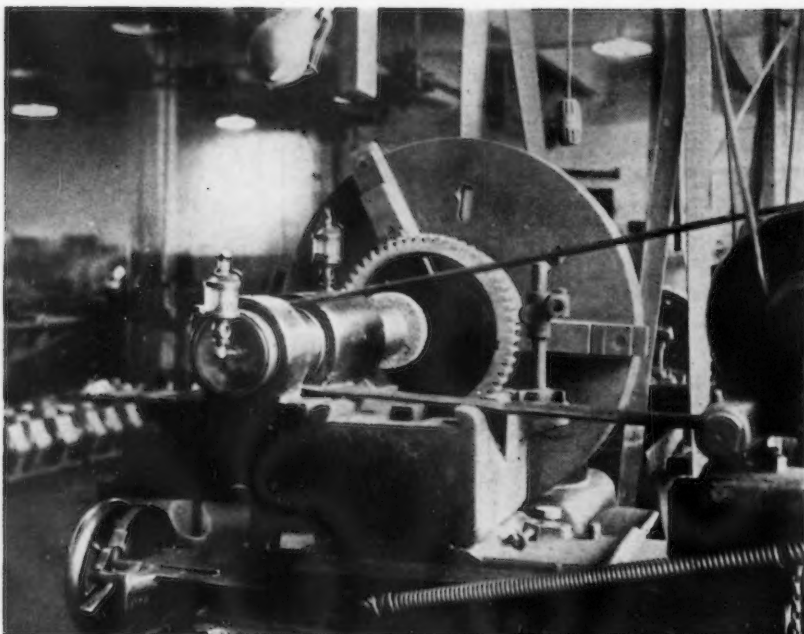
Finishing a 9¼-in. diameter, 5-in. long bore in a heat-treated sleeve gear. The machine is also employed for grinding bushings, as well as for other gears of other types and sizes. o o o
